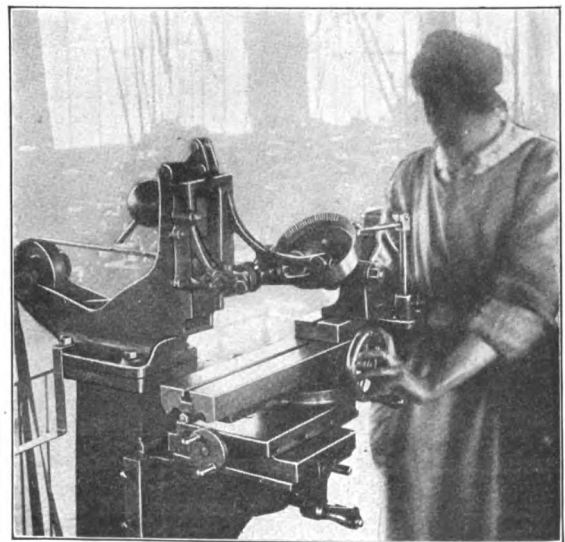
GRINDING VALVE-SEATING CUTTERS
